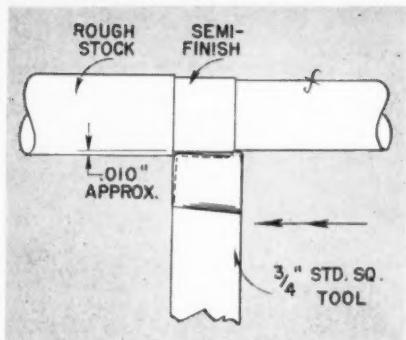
Sketch of combination tool designed to rough and finish turn piece in one pass.
